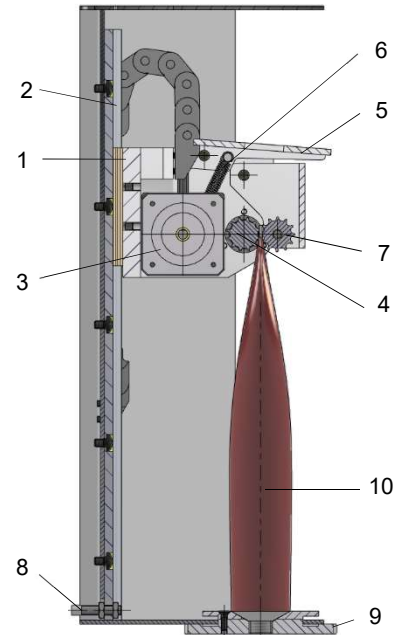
CAD 3D model of the dispenser (section): 1 – sliding block, 2 – guide rail, 3 – stepper motor, 4 – drive roller, 5 – latch, 6 – spring, 7 – clamping roller, 8 – proximity sensor, 9 – socket, 10 – tube
